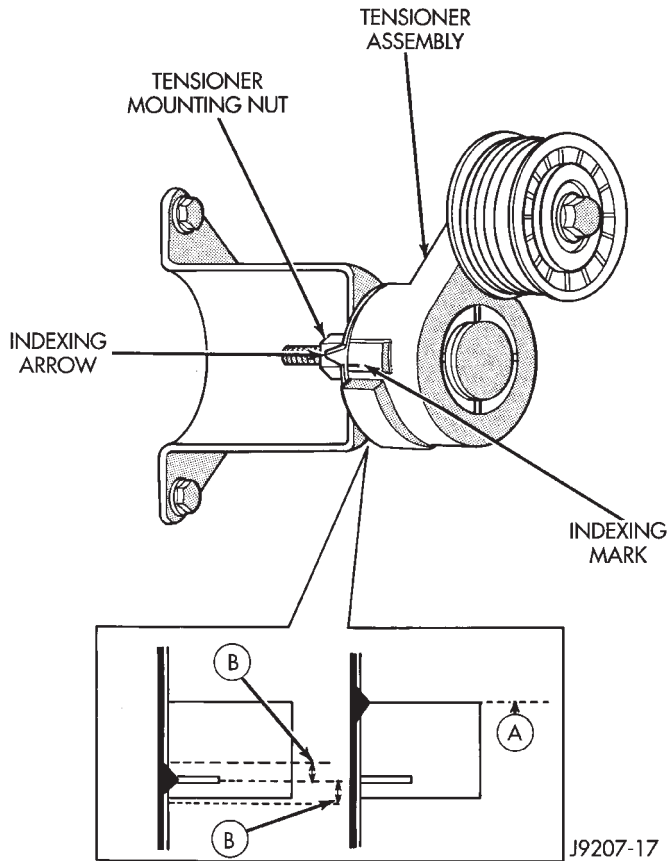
Belt Tensioner/Pulley Assembly—5.2L Engine
